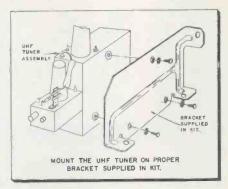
The UHF tuner is secured to a mounting bracket supplied with the kit.
